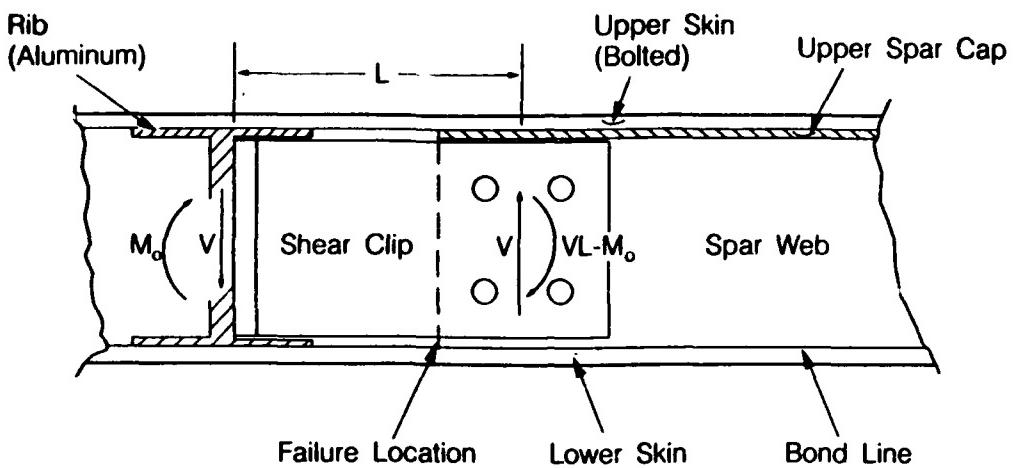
WING BOX SUBCOMPONENT LOWER SKIN/INTERMEDIATE SPAR JOINT SHEAR CLIP LOADING
